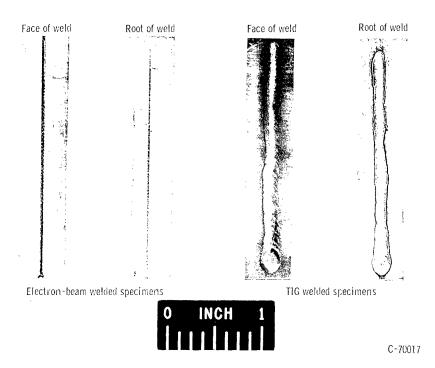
Typical appearance of all electron-beam and gas tungsten-arc welded specimens.
